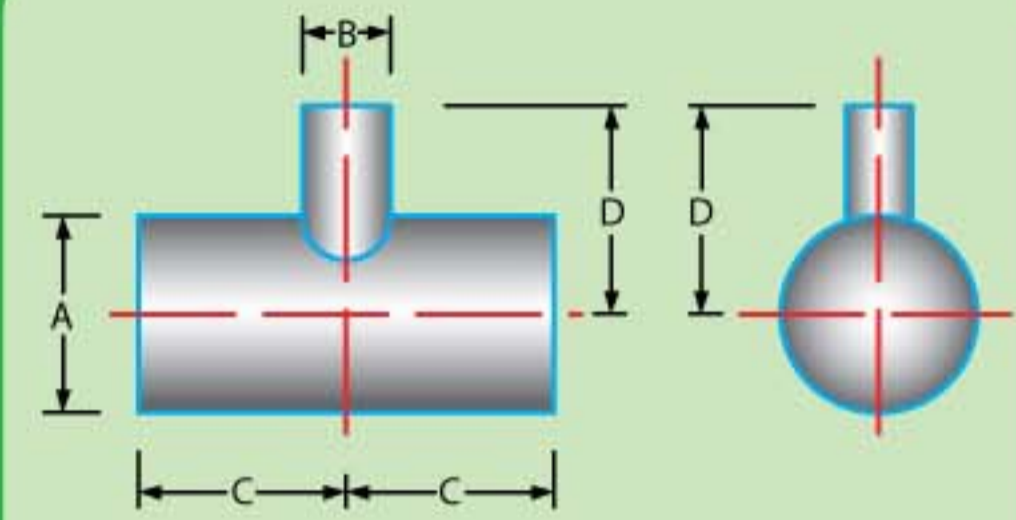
Plain End Tee for Slip-on Type Coupling and Butt Welded Joint
